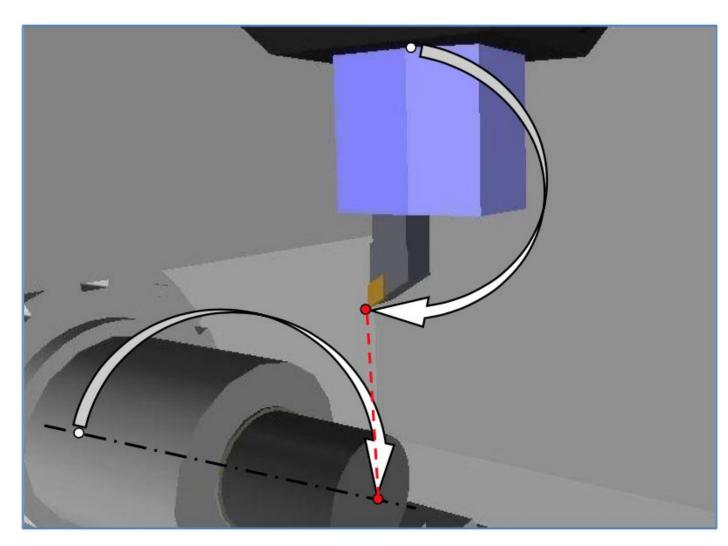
Workpiece coordinate system: tool tip referring to the part zero point
